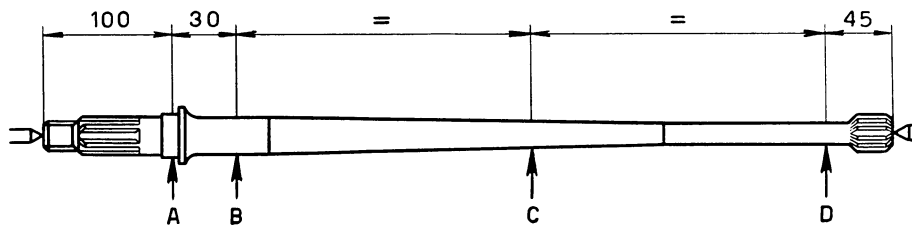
Diagram for runout inspection of axle shafts.
